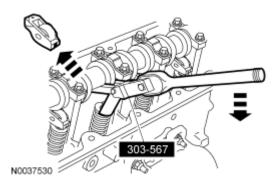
Removing Camshaft Roller Followers Courtesy of FORD MOTOR CO.
